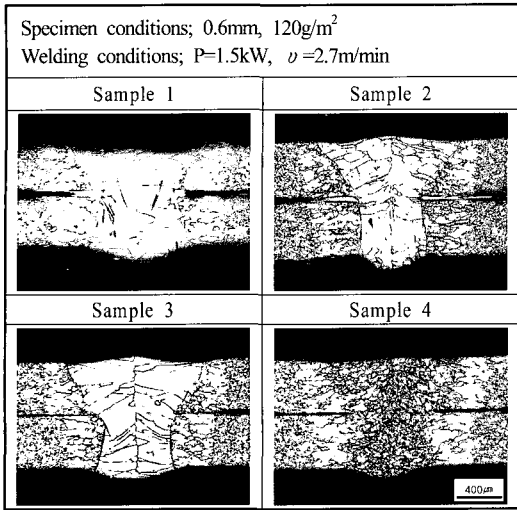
Weld cross-section of surface pre-treated specimens
